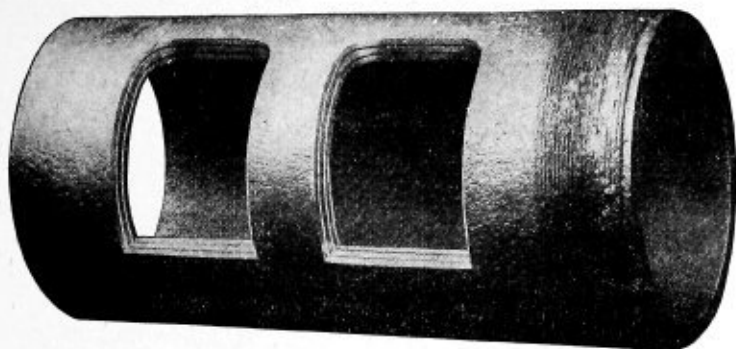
Three Sections of Pipe Telescoped Without Fracture
